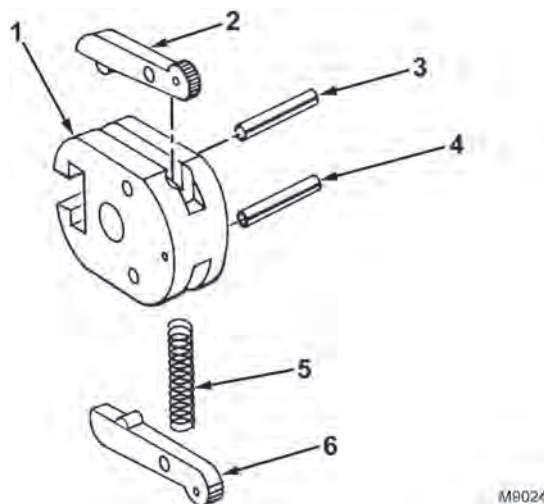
M9 Multipurpose Bayonet System Latch Assembly.
